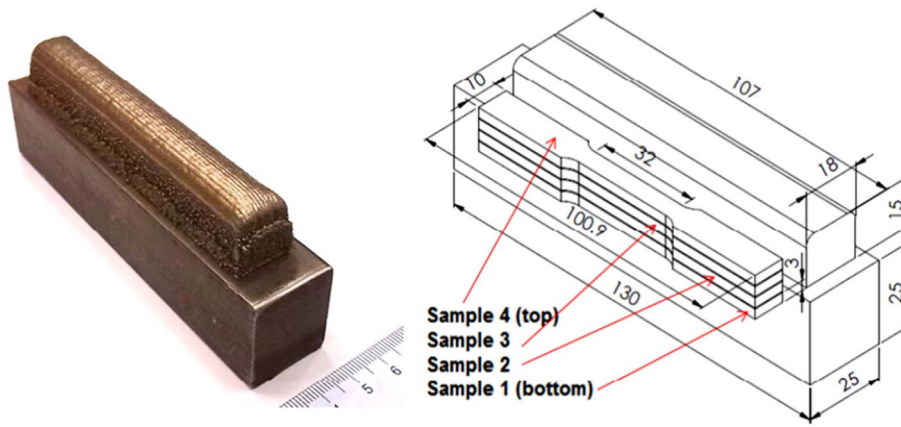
a) Geometry of the clad part obtained on its steel support; b) test part design and position of the samples within the clad part.
